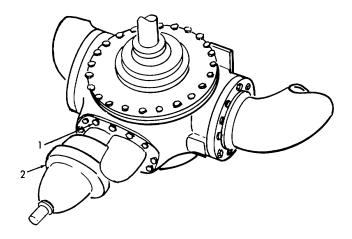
Pressure Relief Valve, Removal/Installation.
